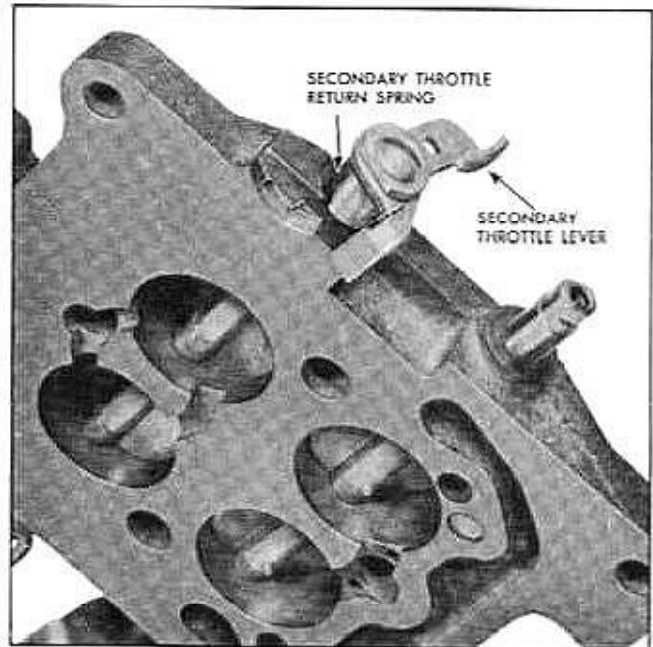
B-19 Proper Assembly of Secondary Throttle Lever
